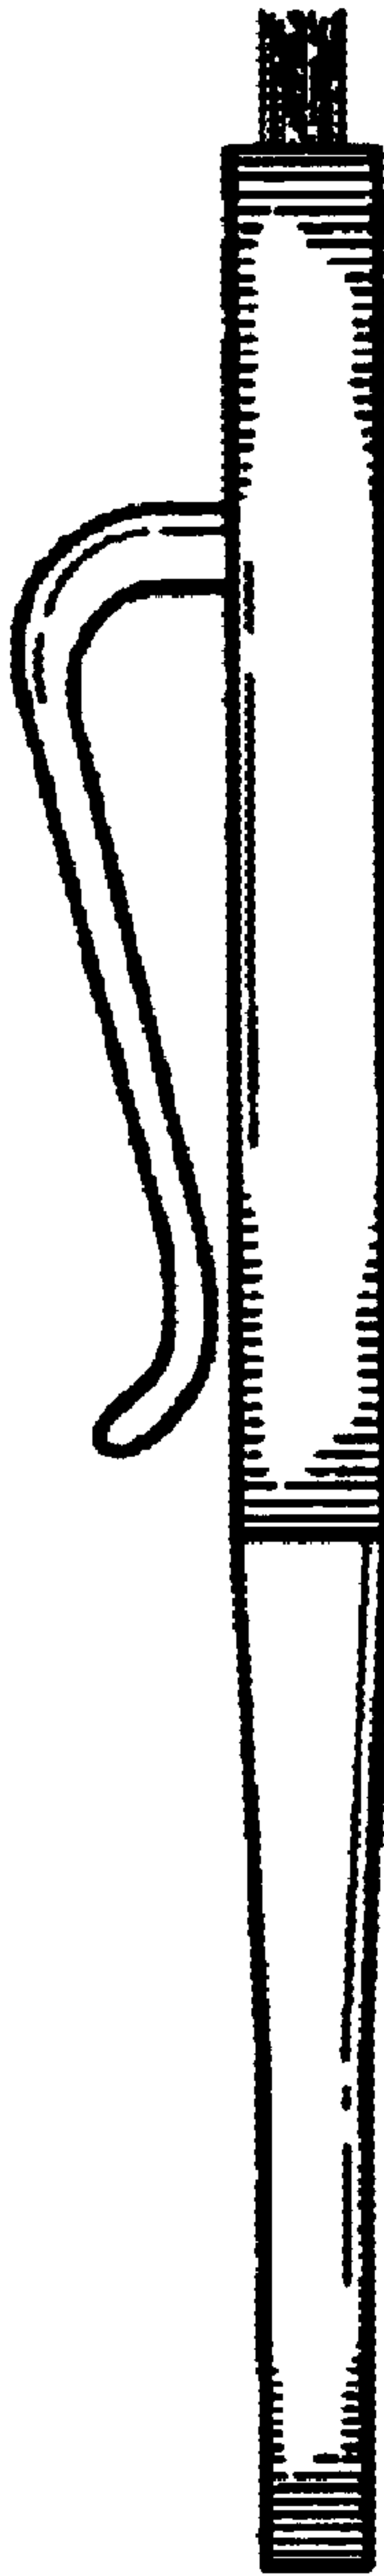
is a front perspective view of a preferred embodiment of a golf divot tool showing my new design;
